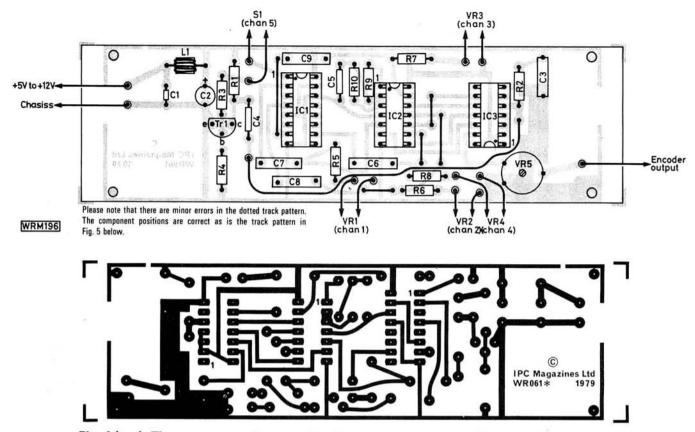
(top): The component placement for the encoder board. Fig. 5 (above): The copper track layout is shown full size
